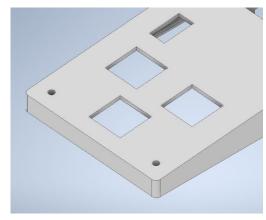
The three mounting holes for MX-compatible switches on the Béton3 chassis
